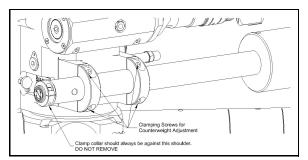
LOCATION OF CLAMPING SCREWS
